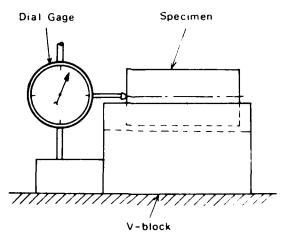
Assembly for Determining the Perpendicularity of End Surfaces to the Specimen Axis
